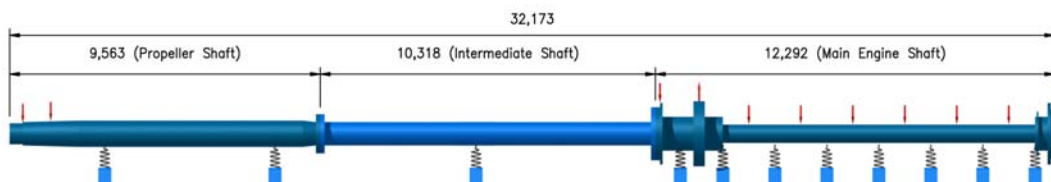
Shafting system of 320,000 DWT crude oil carrier
